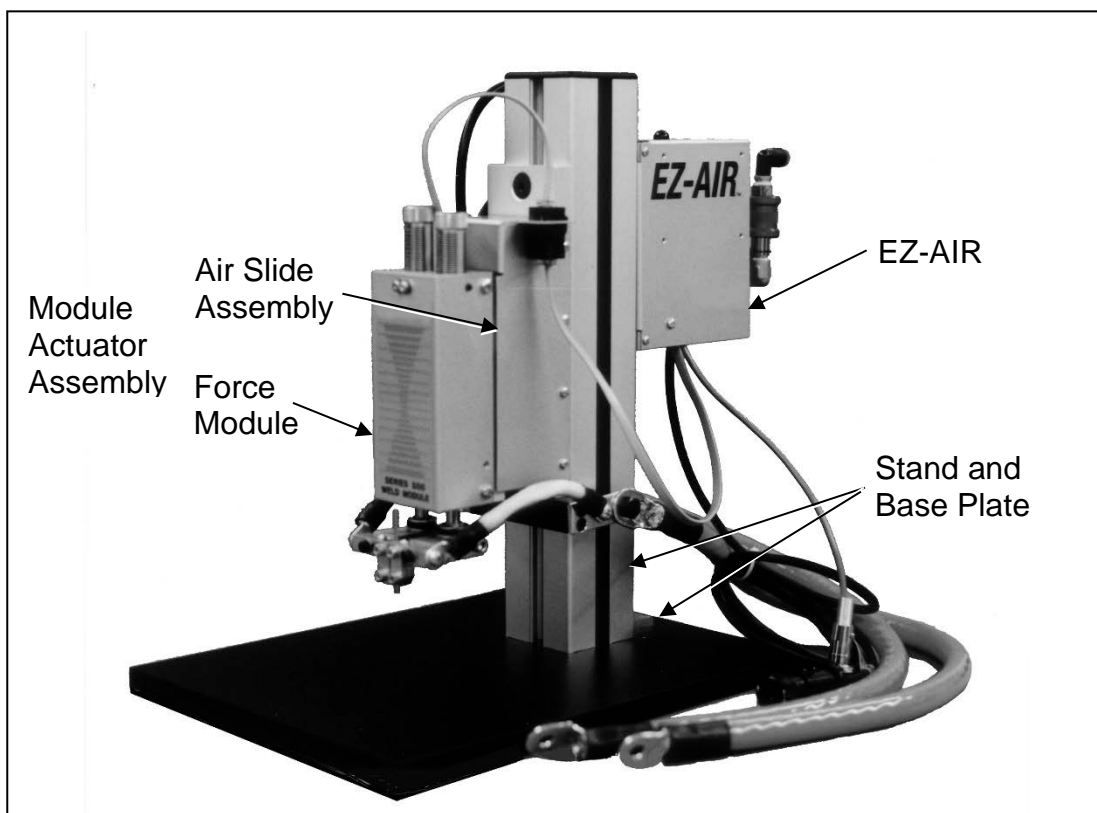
TL-508B Weld Head, Major Components
